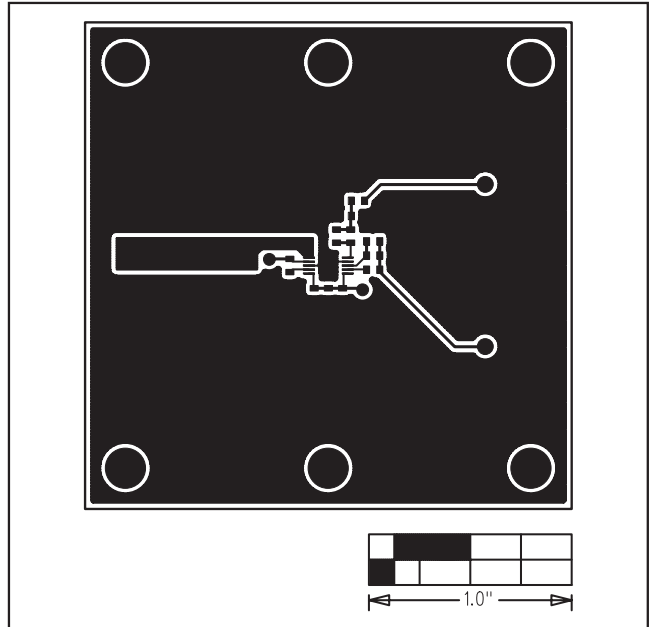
MAX9532 EV Kit PCB Layout—Component Side
